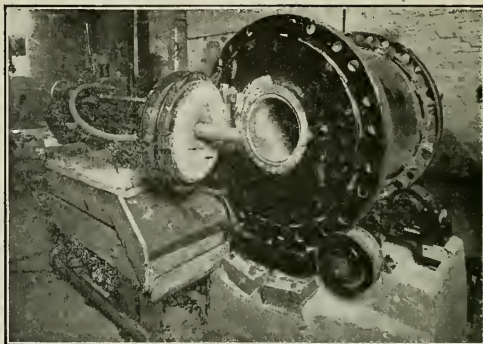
REAR VIEW, SHOWING CHARGING DOOR
